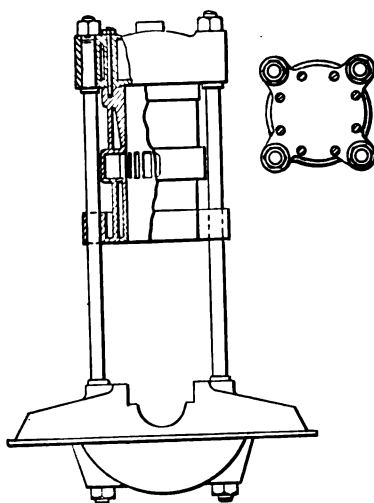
SECTIONAL DRAWING SHOWING CYLINDER OF 2000 H.P. (DESIGN BY SULZER BROTHERS)
